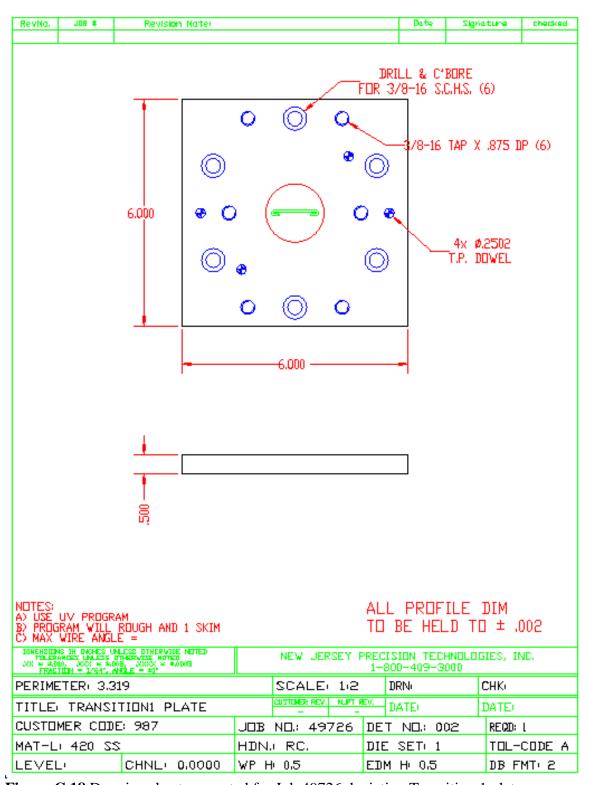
Drawing sheet generated for Job 49726 depicting Transition 1 plate.
